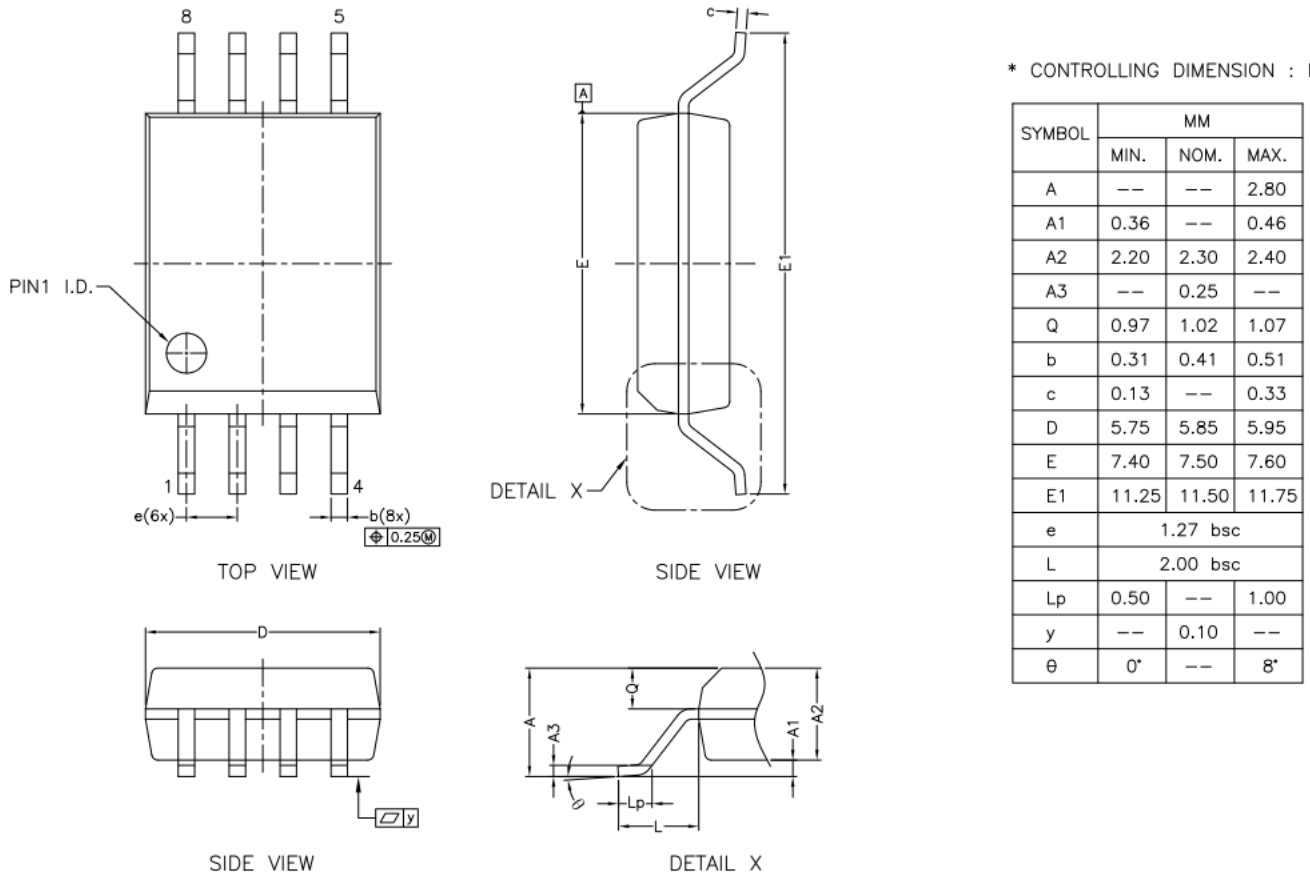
SOW8 Package Shape and Dimension in millimeters
